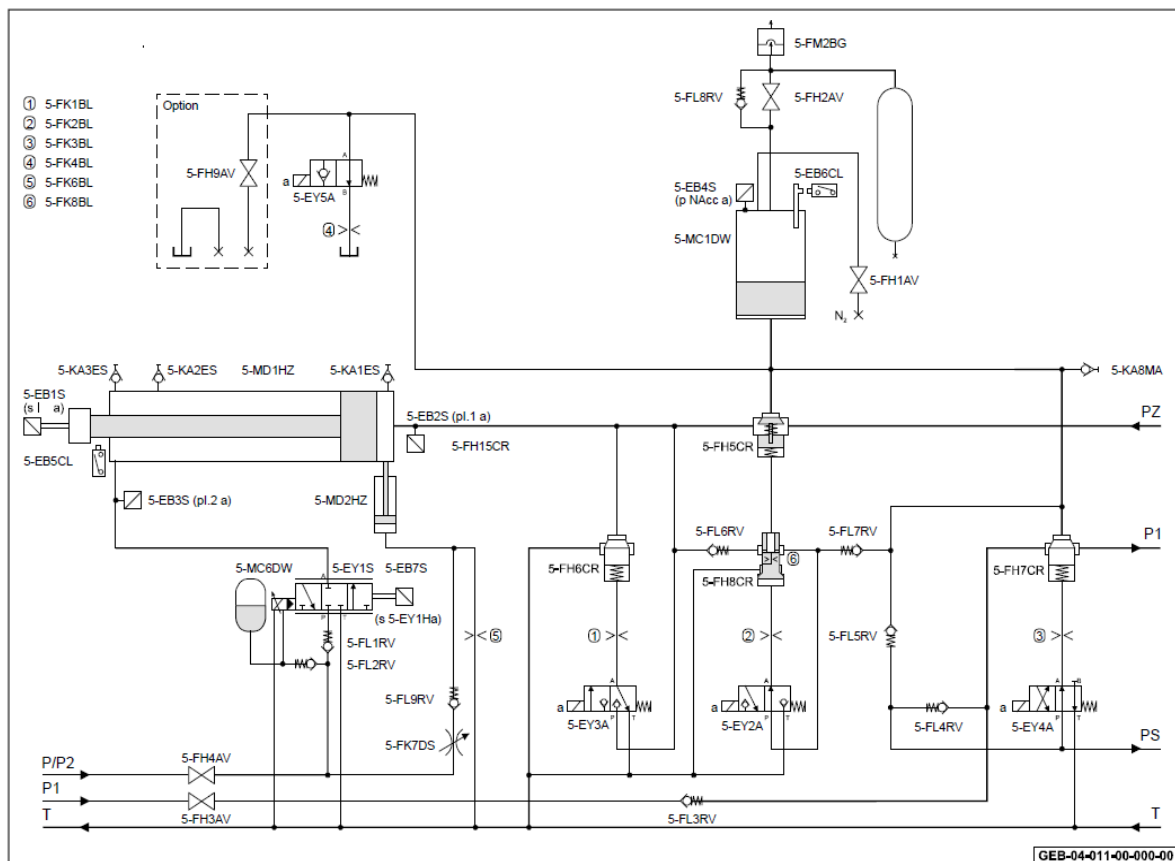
Plunger Position Measuring and Pressure Sensors Installed on the Diecasting Machine
